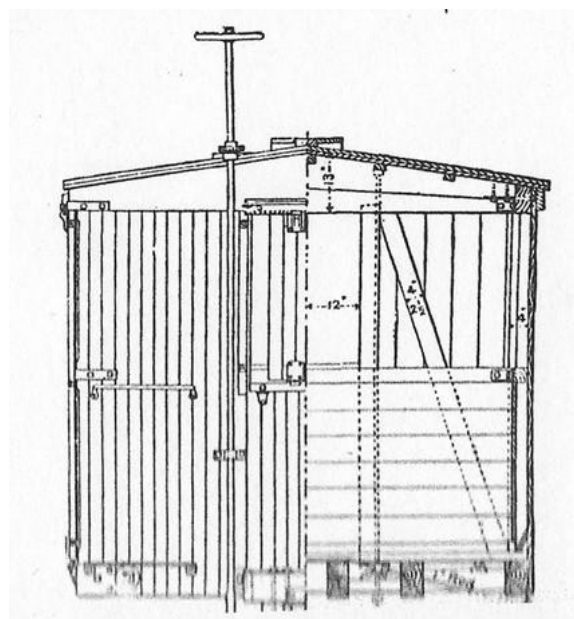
Starting plan for end detail. 1883 Great Northern box car. The sub floor transverse tie rods across the car above the truck bolsters can be seen on the lower right of the plan. Source: *The American Railroad Freight Car*, by John White.
